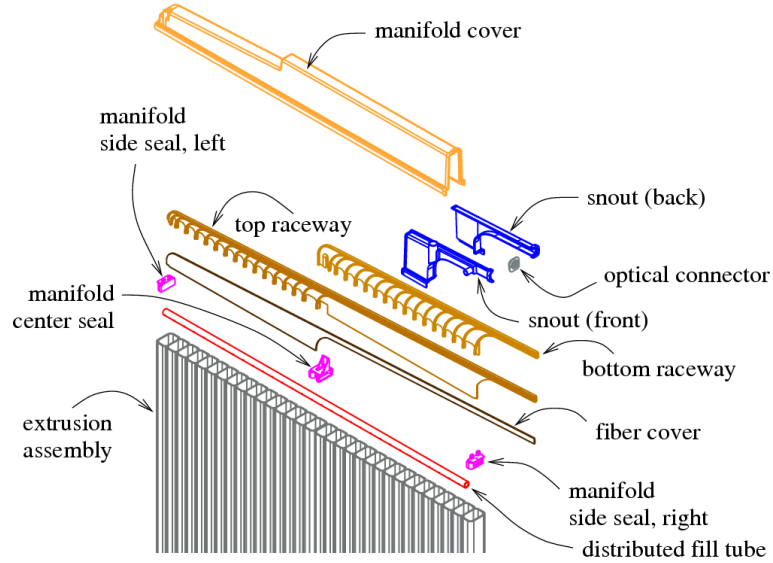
An exploded view of the manifold end of a NO ν A module.[5]
